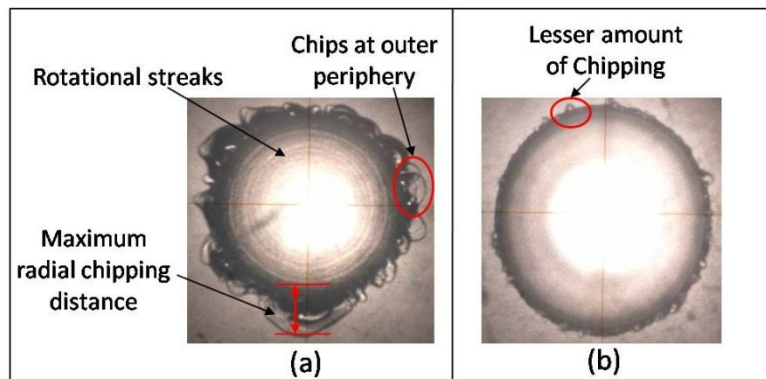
Images of machined blind holes by CD and RUD by a Flat cylindrical tool (Height > Diameter) (a) Blind hole by CD (b) Blind hole by RUD
